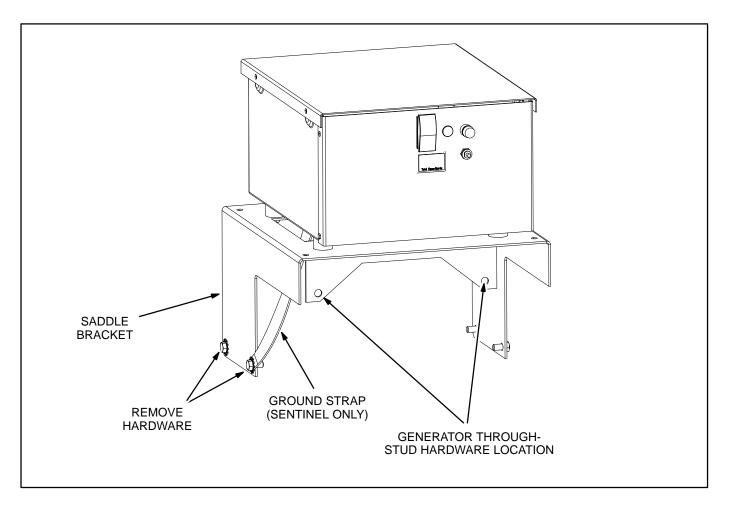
CONTROL BOX MOUNTING BRACKETS/HARDWARE
